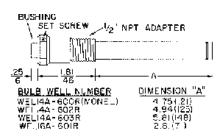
Bulb well for liquid immersion applications where a temperature bulb may be removed without draining tank.
